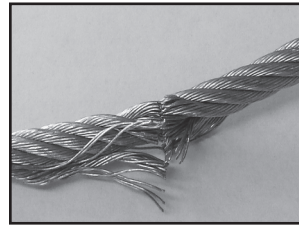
EXAMPLES OF EQUIPMENT DAMAGE
